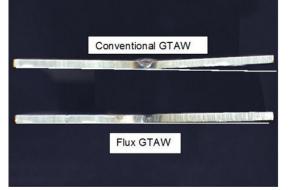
Macrographs of full penetration bead-onplate welds produced on 7.7-mm (5/16-in) thick Alloy 718 plate at 3-ipm travel speed with no flux (235A, left) and with EWI DeepTIG flux (135A, right)
